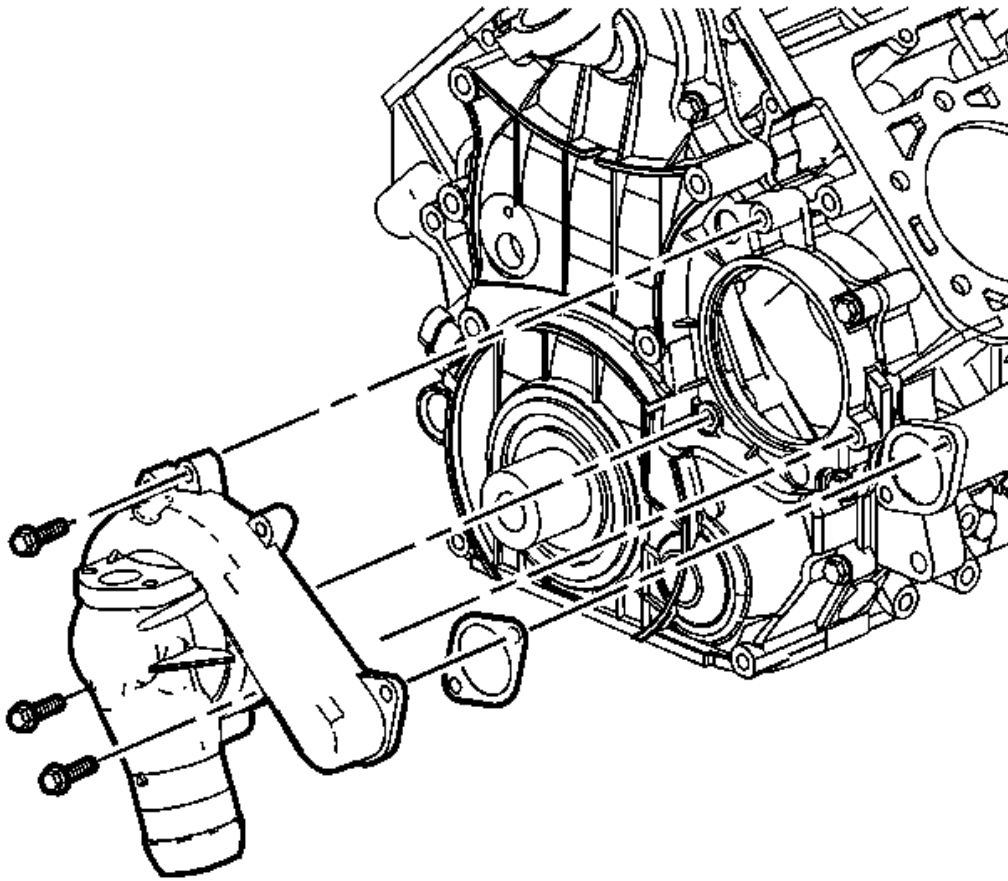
View Of Engine Coolant Pipe & Gasket
